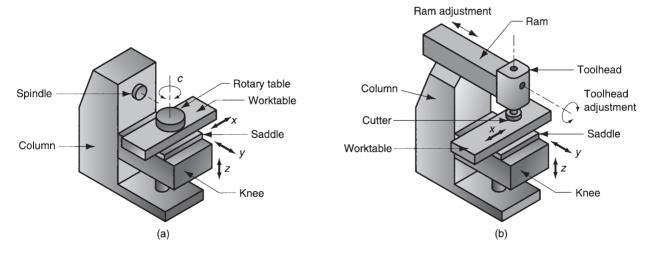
Special types of knee-and-column milling machine: (a) universal—overarm, arbor, and cutter omitted for clarity: and (b) ram type.
